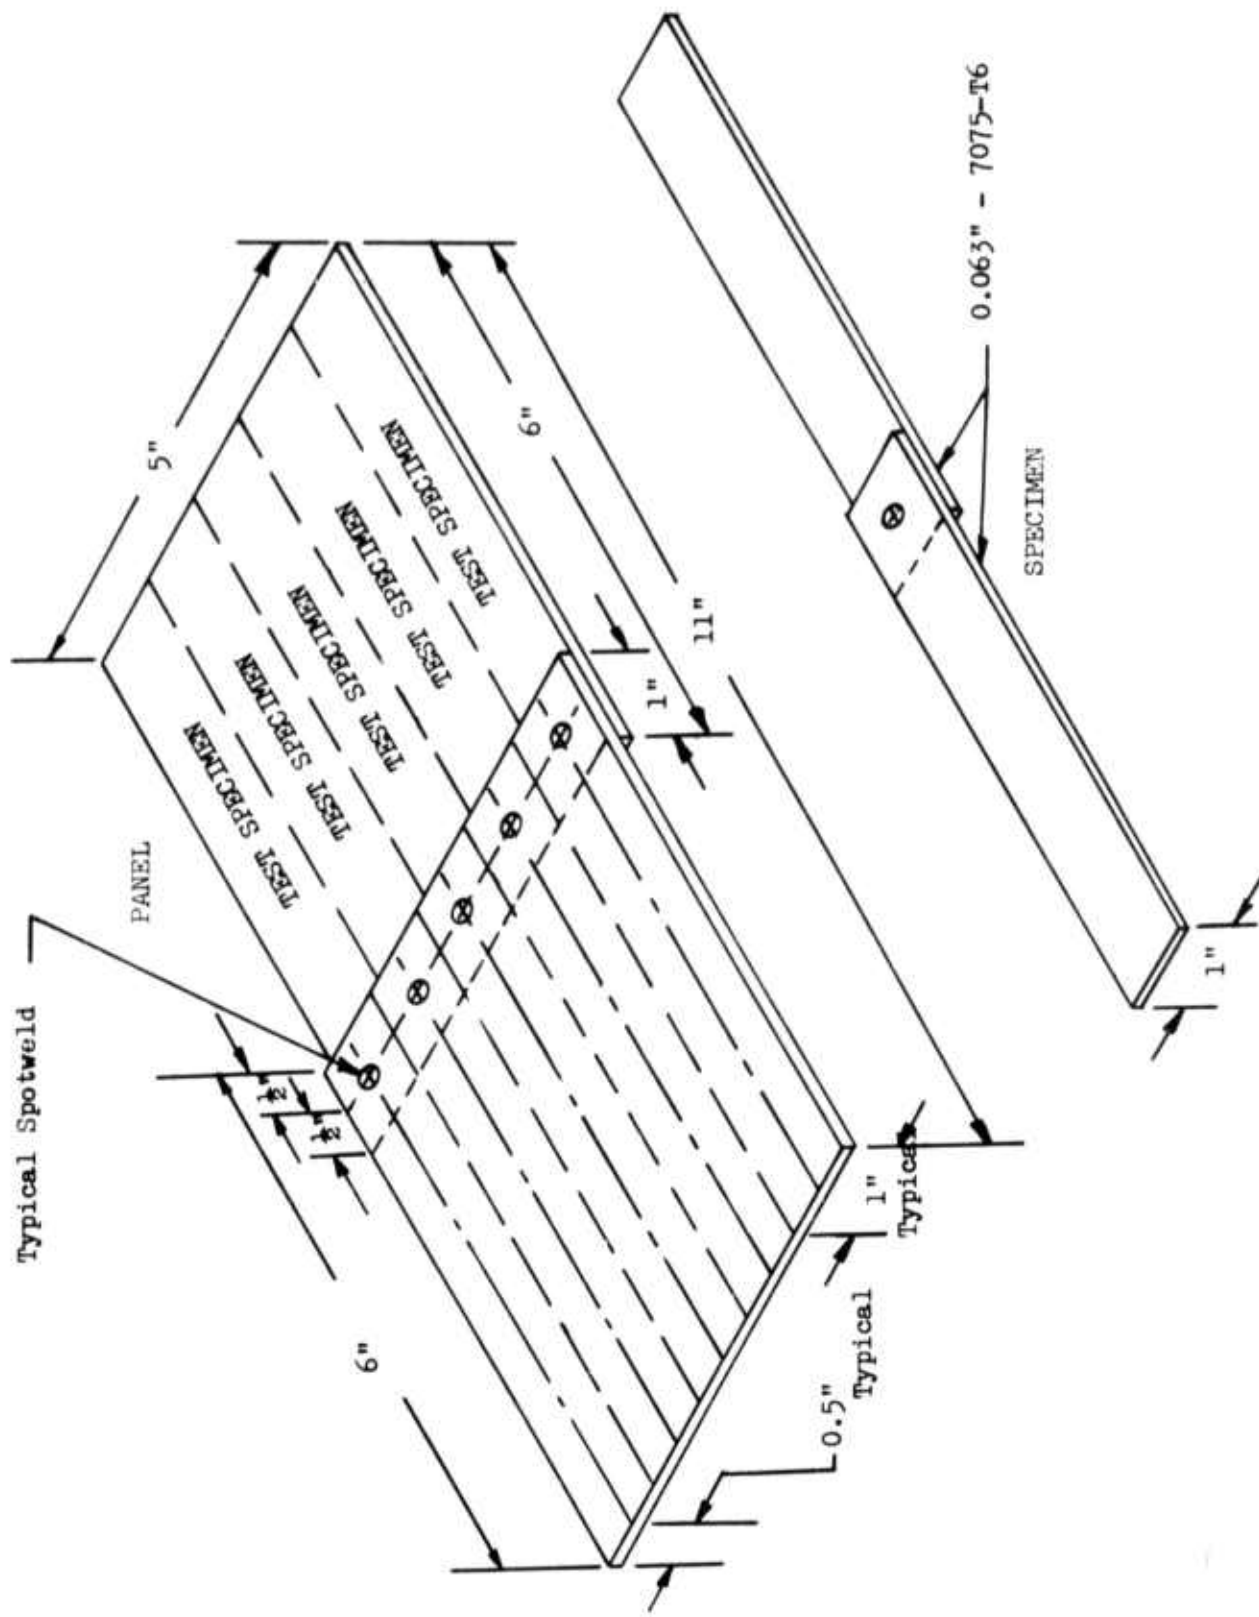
LAP SHEAR (WITH SPOT-WELDS) TEST PANEL AND TEST SPECIMEN
